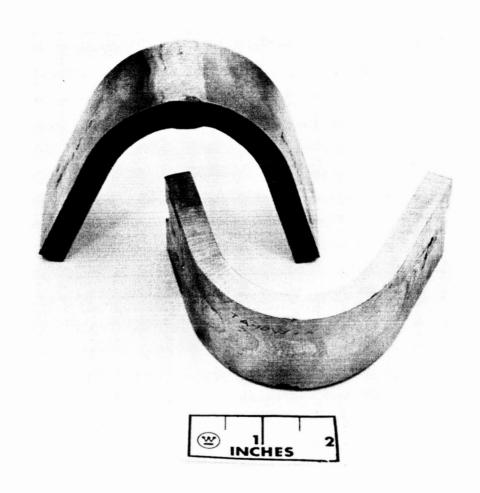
Plate Butt Weld Bend Test Fixture
